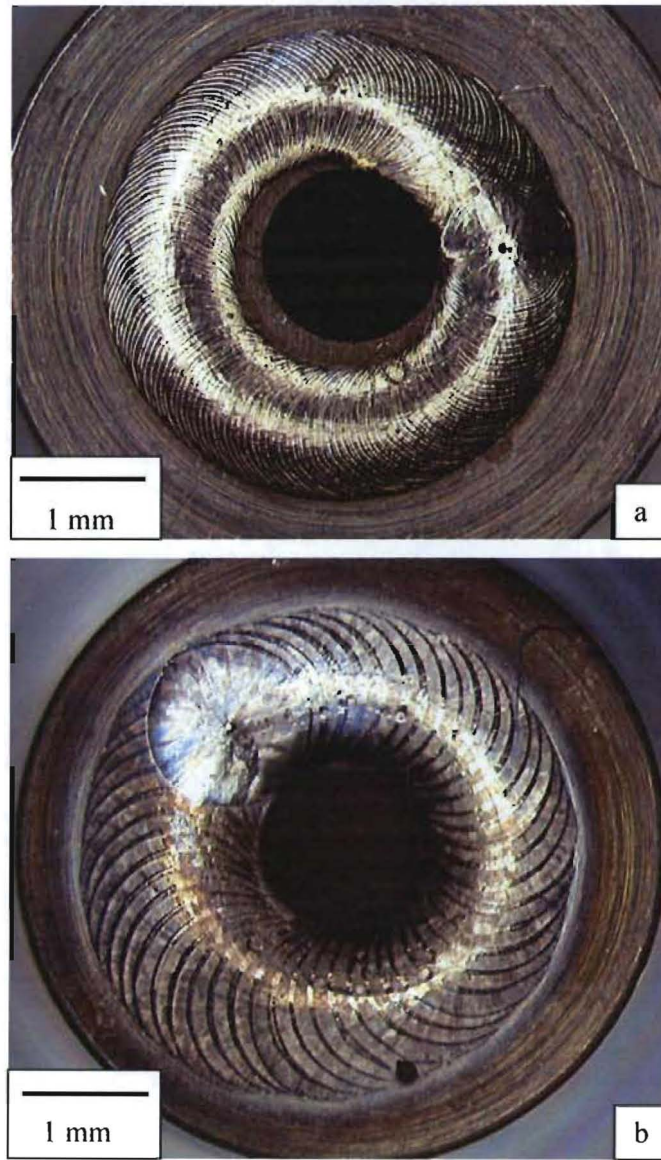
Top view of the tubes after welding. The pulsed laser beam welded tubes are in 3a and the pulsed gas tungsten arc welded tubes are in 3b.
